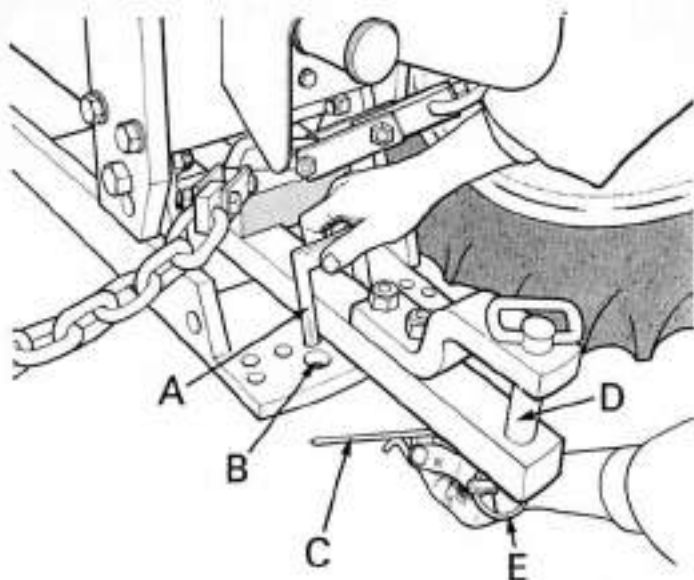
/4. DRAWBAR IN TRAILER TOWING POSITION
